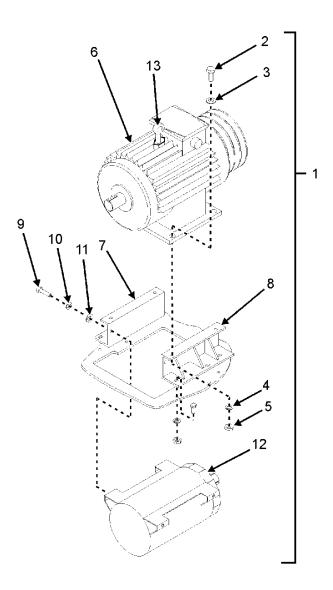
Standby Motor/Single-Phase Alternator Assembly.
